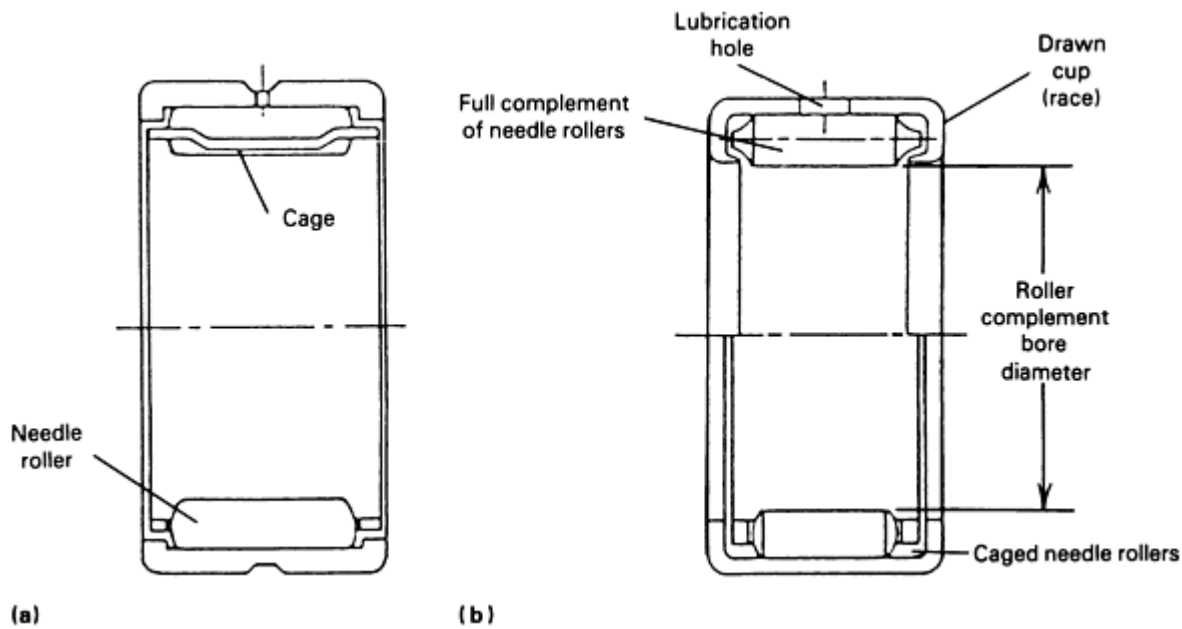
Two types of radial needle roller bearing. (a) Machined ring with cage. (b) Drawn cup
